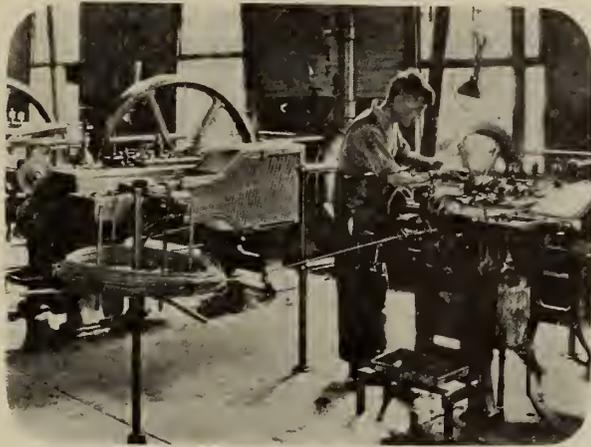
Type of Machine Used in Cold Pressing Method.
